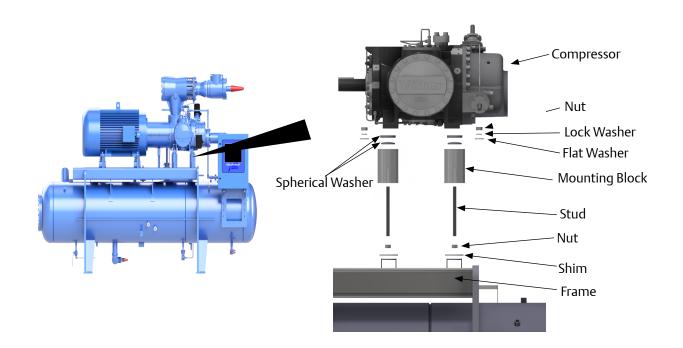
Compressor Replacement and Hardware Assembly (Models 2401-3001 Shown)
